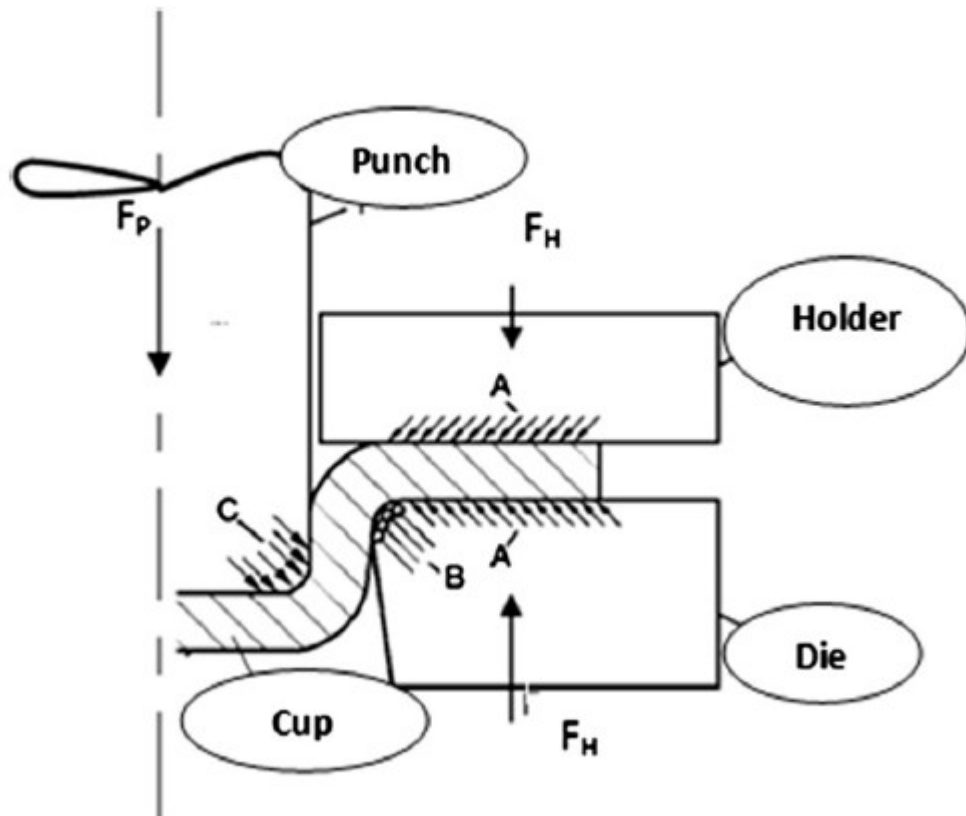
Friction regions in a deep drawing a cup. (A) Friction surface between blank and binder & die; (B) friction surface between blank & the die corner radius and (C) friction surface between blank & the punch corner radius;  $F_p$ , total drawing force;  $F_H$ , blank holding force.[1]
